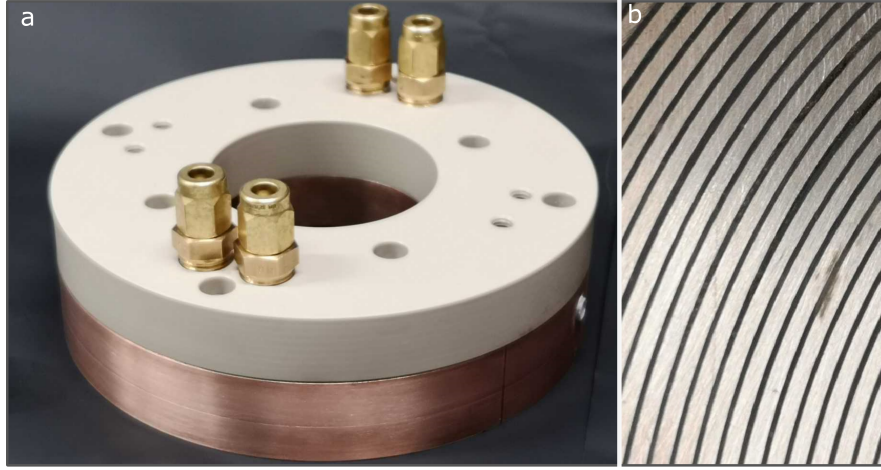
a: Photograph of the assembled electromagnet, showing the PEEK cap attached to the coil body, with coolant connections from the top. b: Close view of the top surface of the coil after glueing and machining, showing the successive windings separated by the electrically insulating epoxy. The width of a copper winding is 0.92 mm.
